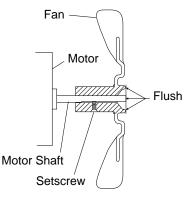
Fan Cross Section 35/55/110,000 BTU/Hr Models
